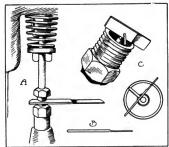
Home Made Measuring Tool Constructed from a Piece of Hacksaw Blade, and Depicting Some of the Uses to Which It May He Put.
